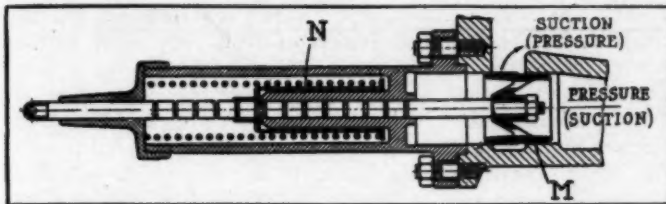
Section of the clutch, moderator and safety valve of Lentz drive
